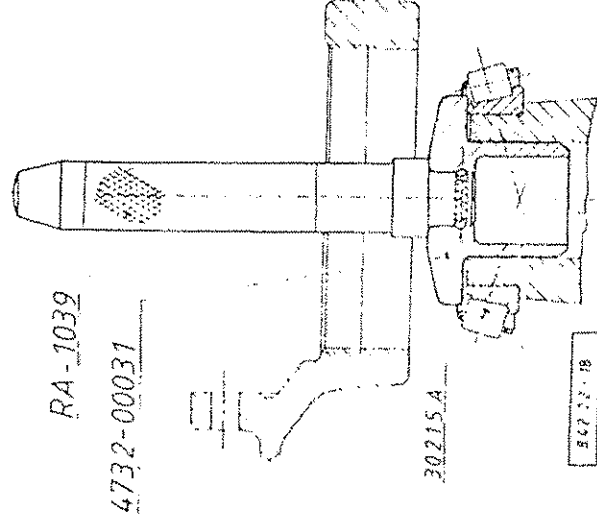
DRIVING ON THE TAPER ROLLER BEARING CONE
